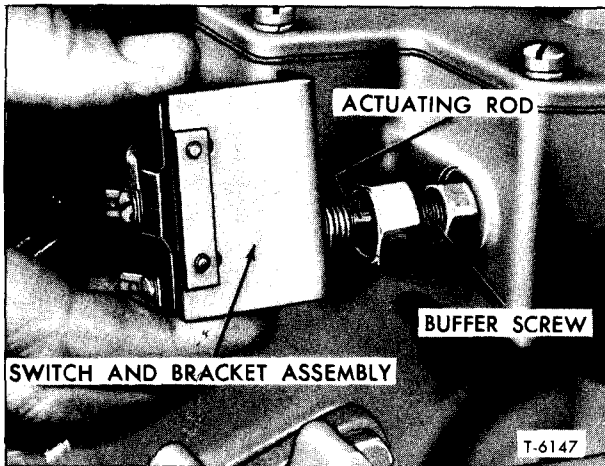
Removing or Installing Switch and Bracket Assembly at Buffer Screw
